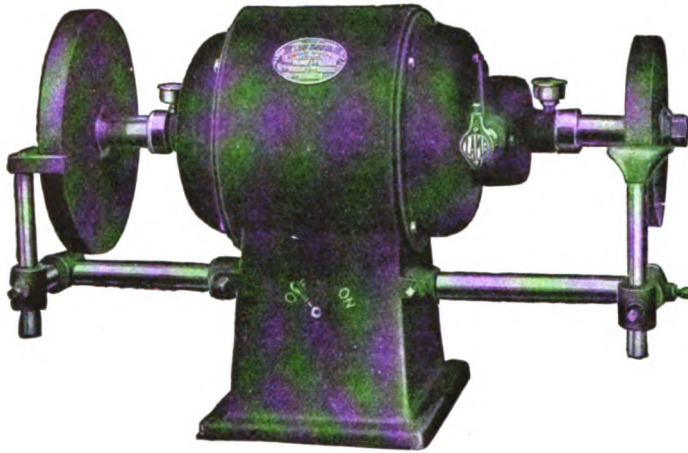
OLIVER MOTOR-HEAD LATHE.
